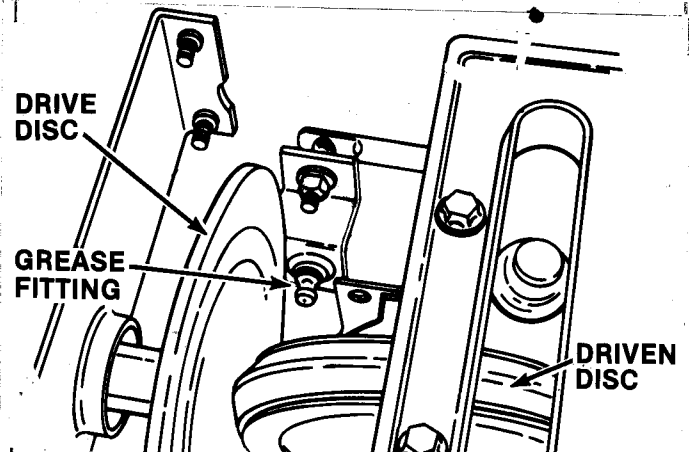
SPEED SHIFT & DRIVE DETAIL
